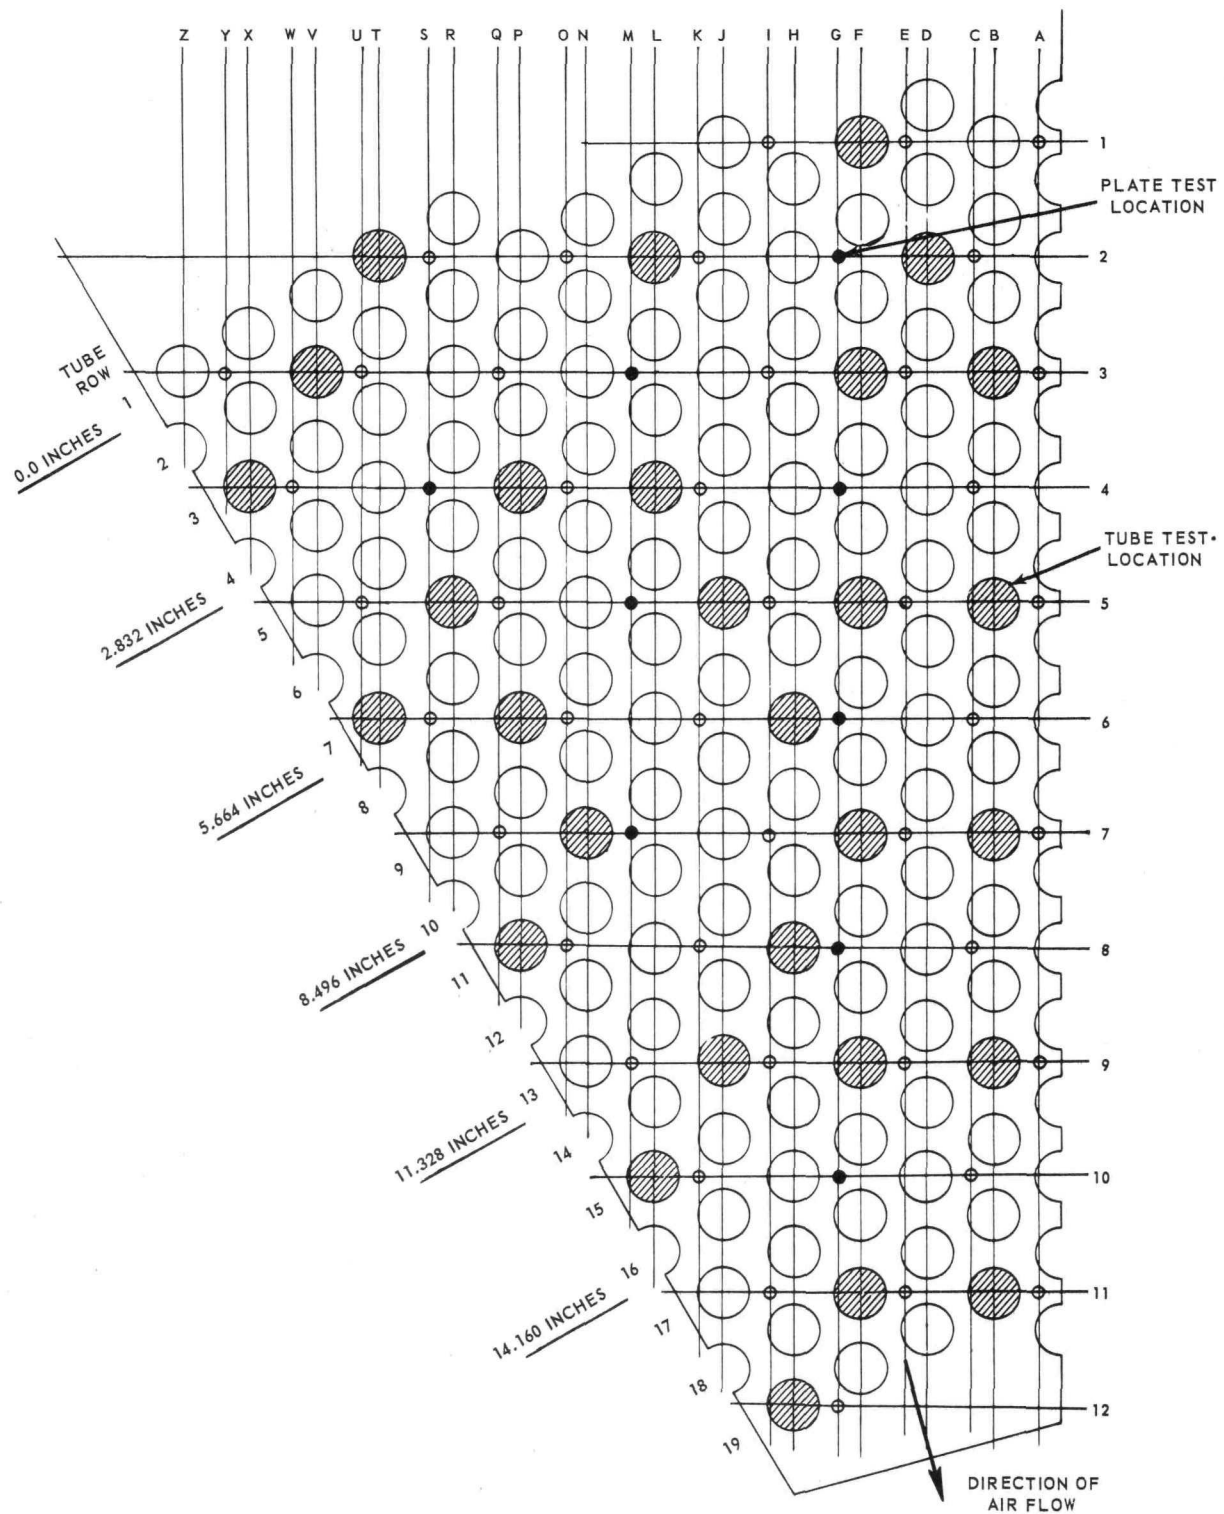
XNJ140E-1 aft retainer assembly test model
